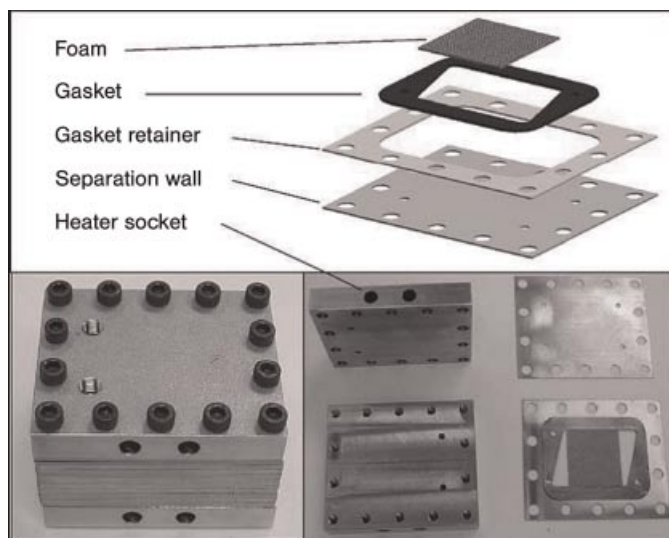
Sketch/exploded view of the layer assembly (top), mounted reactor (left) and photograph of the individual reactor parts (right) [30].
